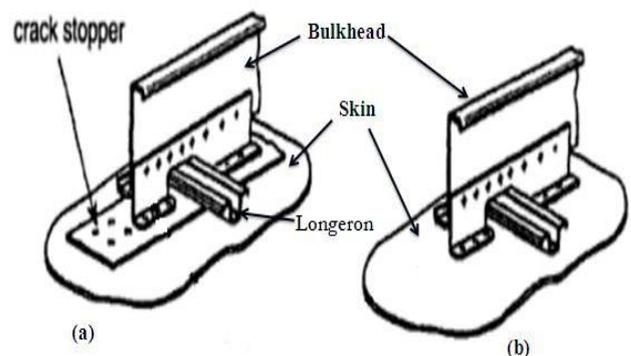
(a) Fuselage Frame with crack stopper (b)Fuselage Frame without crack stopper
